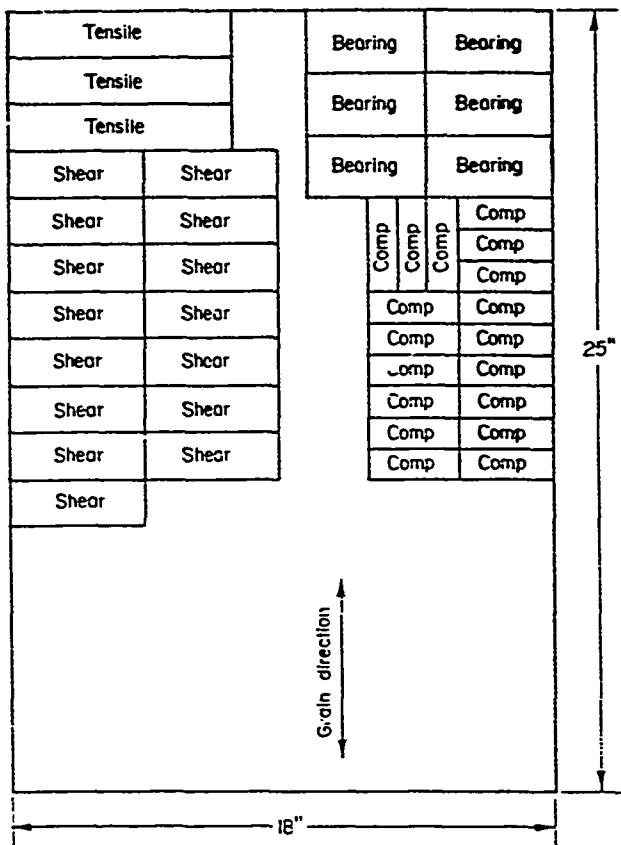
Location of Test Specimens, 0.125-inch Thick Sheet
